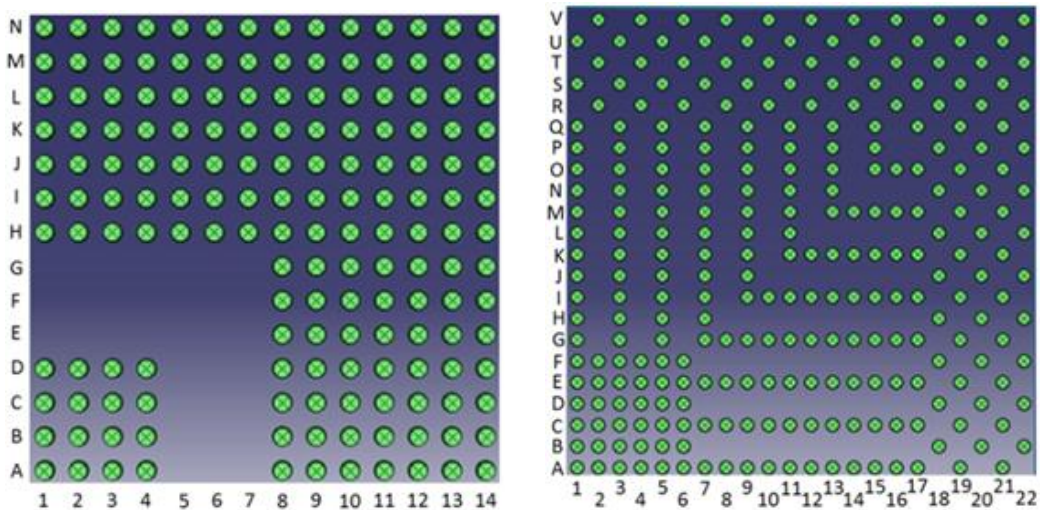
BGA solder pattern for the ICH (left) and MCH (right) packages
